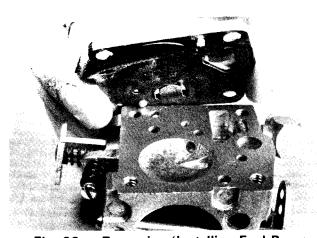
Removing / Installing Fuel Pump Diaphragm, Gasket and Cover
